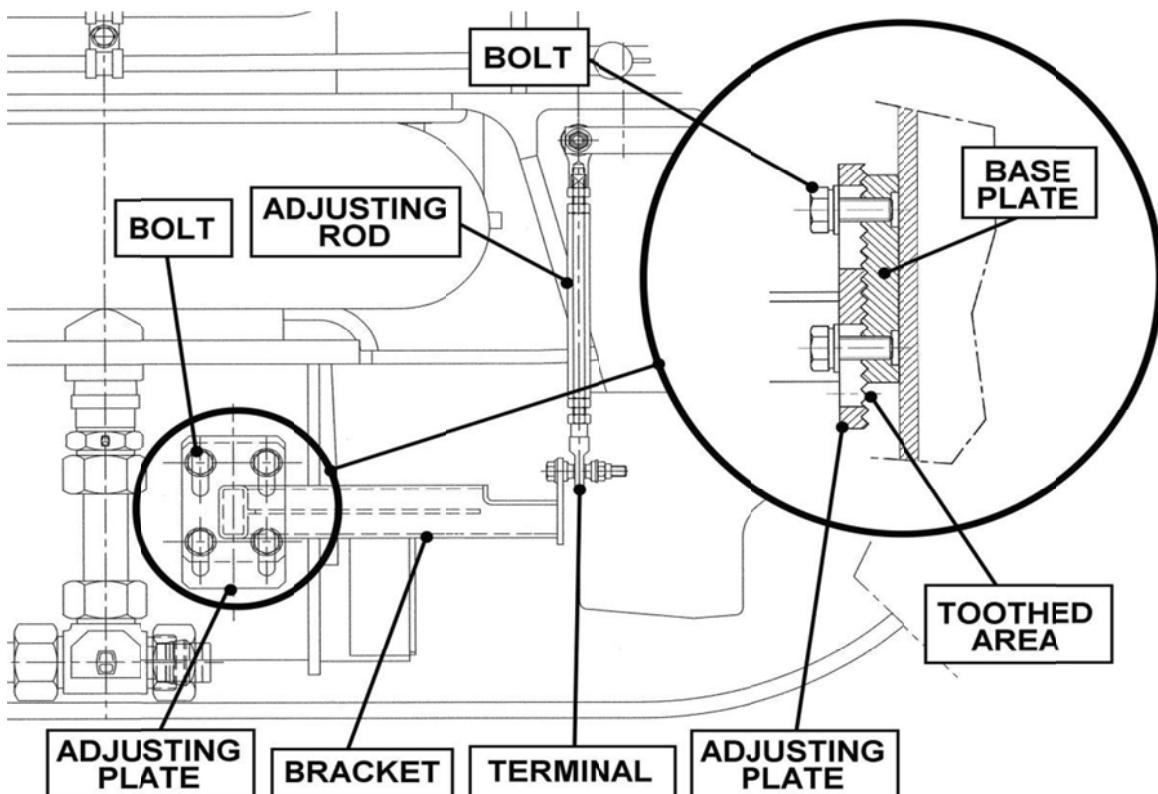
LEVELING VALVE -ADJUSTING & BASE PLATES
